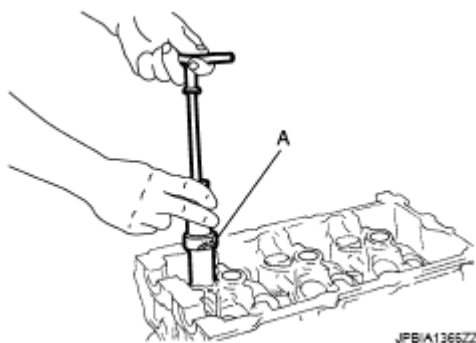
Removing Valve Oil Seal Using Valve Oil Seal Puller
